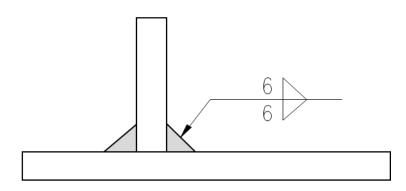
Weld on Arrow Side of Joint
